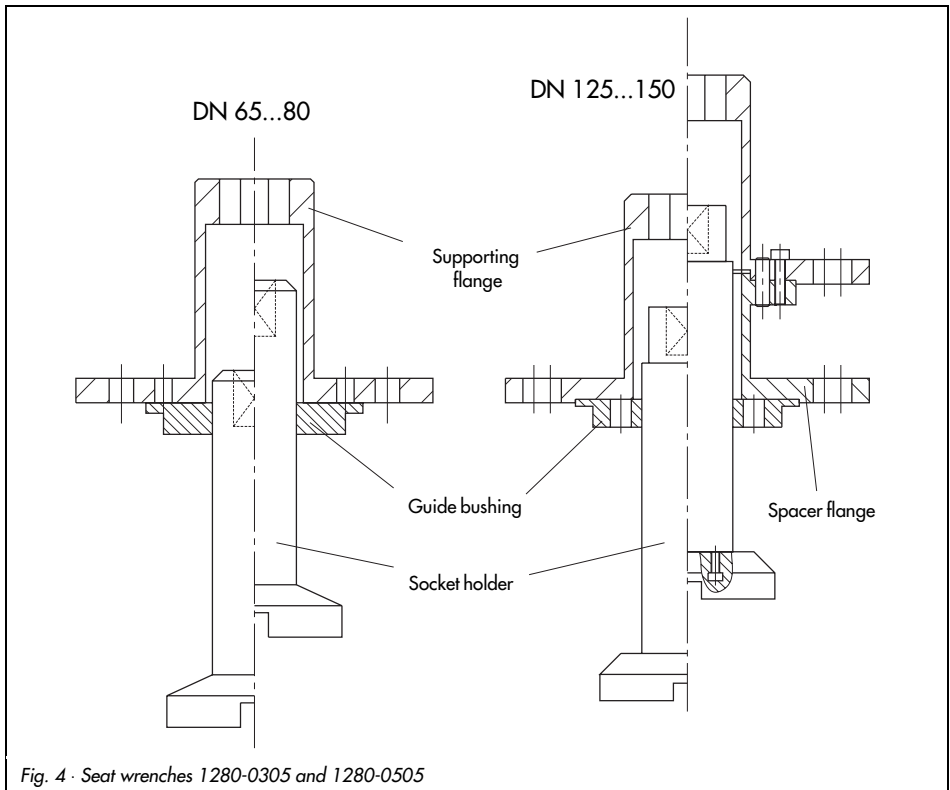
· Seat wrenches 1280-0305 and 1280-0505
